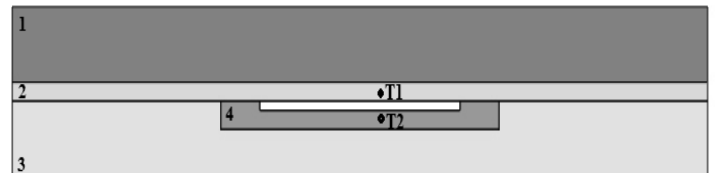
Hybrid mould configuration and setup of thermocouples: 1-steel injection plate; 2-insulating plate; 3-steel ejection plate; 4-moulding block (resin or steel).
